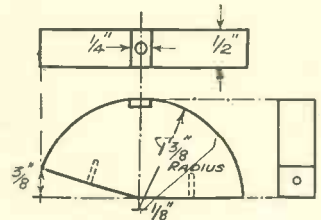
THE SEGMENT AND CONTACT STRIP.
